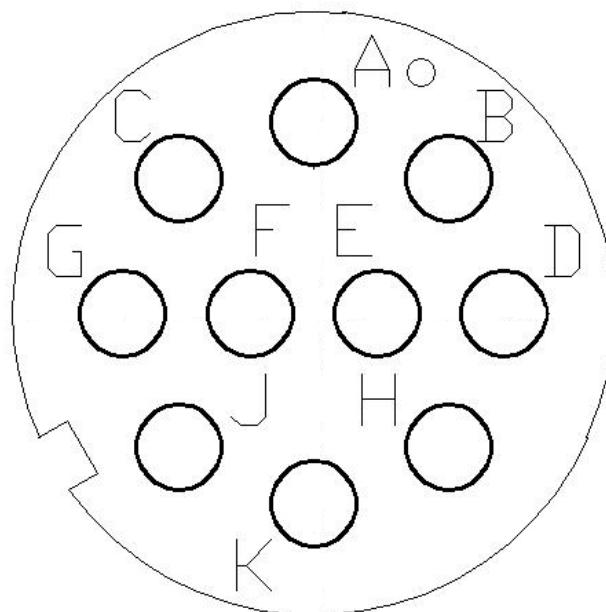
Inverter Box CN2 Connector Layout Drawing
